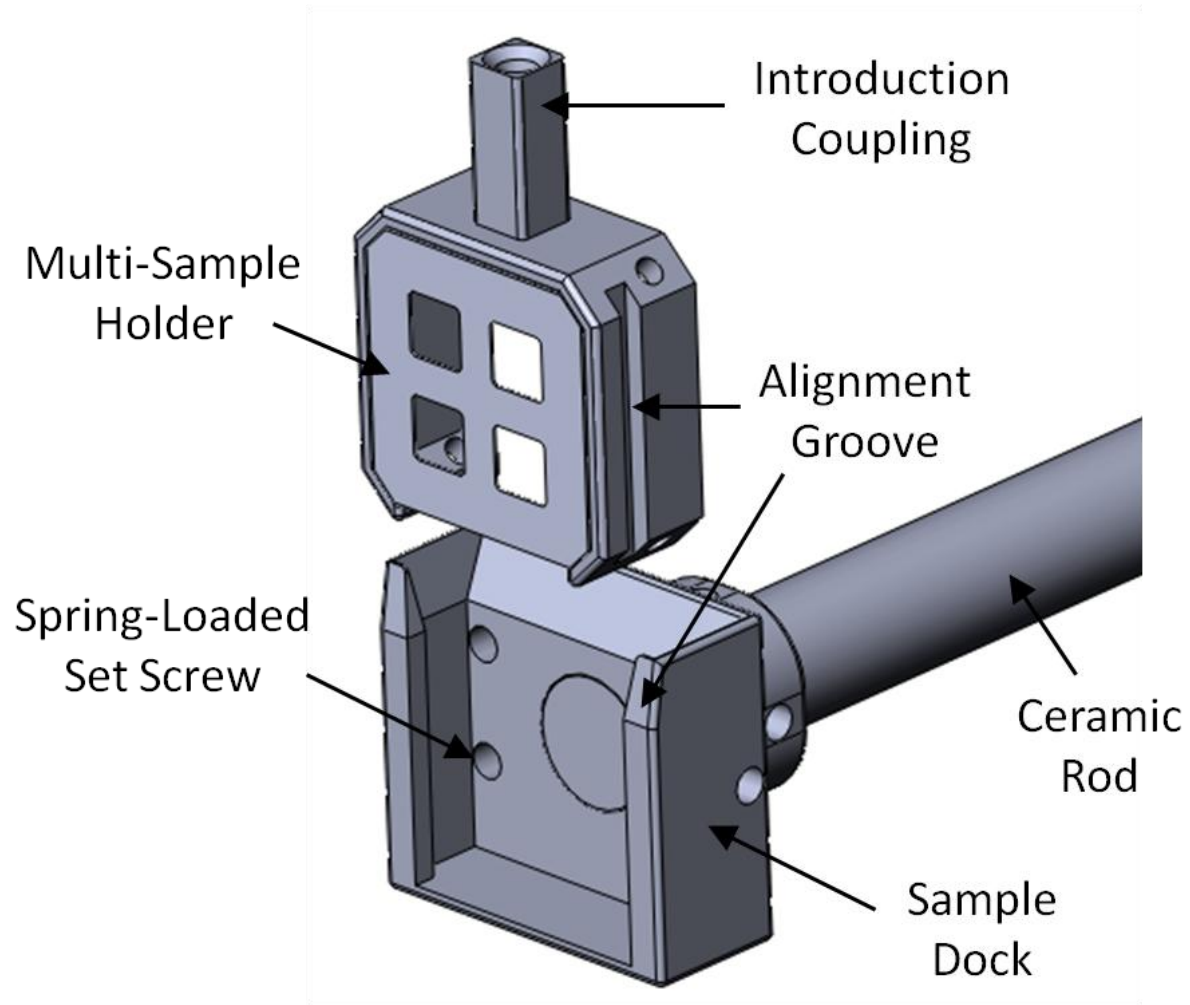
Three-dimensional drawing of sample holder and docking station.
